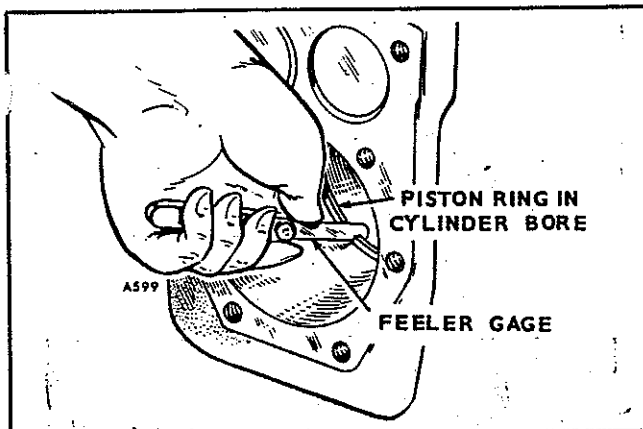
FITTING PISTON RINGS TO THE CYLINDER
